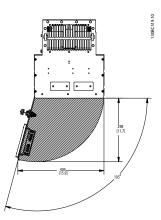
Front Clearance of IP21/IP54 Enclosure Type, Frame Size D1h, D5h, and D6h
